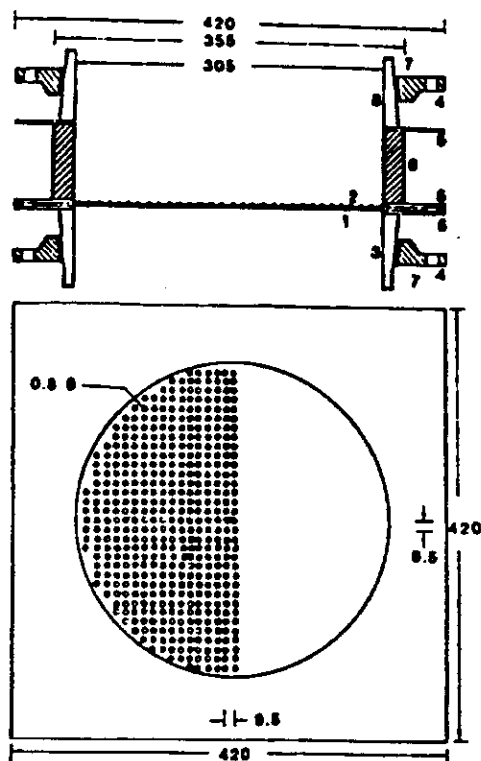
Design details of the perforated gas distributor plate for the 30.5 cm diameter slurry bubble column. (1) perforated plate distributor, (2) stainless steel wire cloth, (3) bottom conical section, (4) flange, (5) gasket, (6) metal insert, (7) soft inserts, and (8) glass column. All dimensions are in mm.
